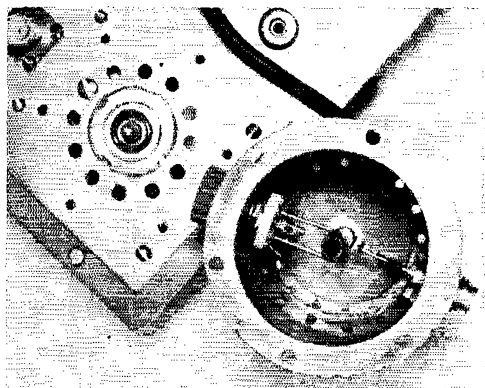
The amplifier plate tank circuit is shown in cut-away form, A. The flange, B, is soldered to the open end of the assembly. The top, C, is made by soldering a slightly over-sized copper plate in place, and then trimming off the excess material.
